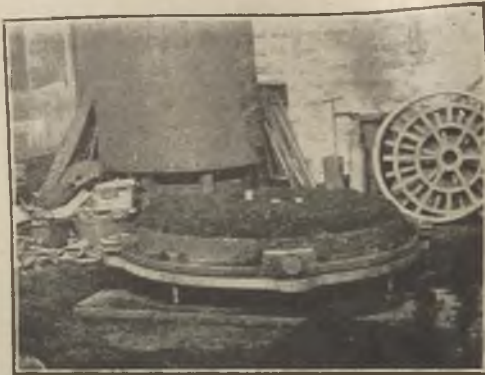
TOP PART FILLED WITH SAND READY FOR JOLTING.
